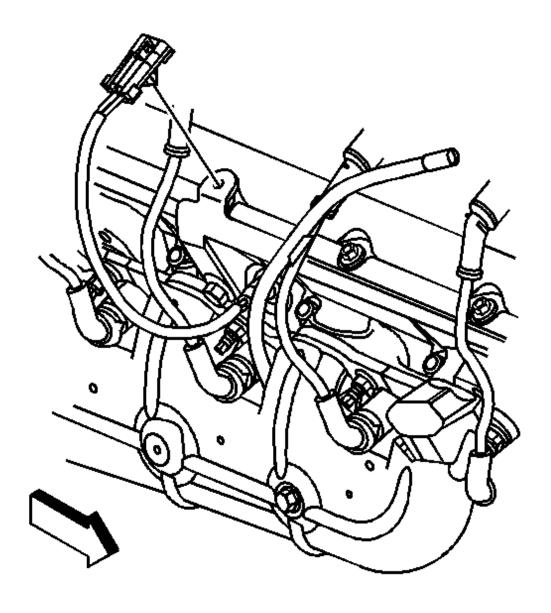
View Of Engine Coolant Temperature (ECT) Sensor Electrical Connector Courtesy of GENERAL MOTORS CORP.
